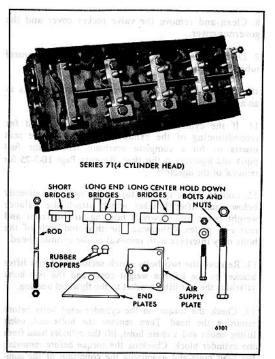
Cylinder Head Prepared for Pressure Test using Tool J 28454
